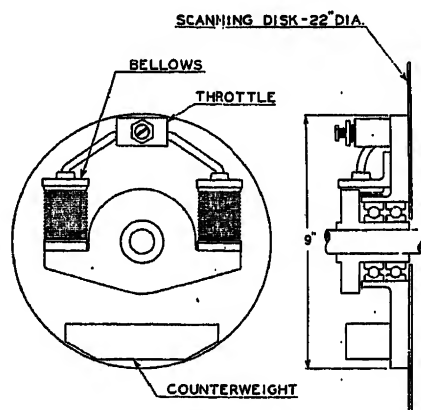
HYDRAULICALLY DAMPED COUPLING TO PREVENT HUNTING OF MOTOR
